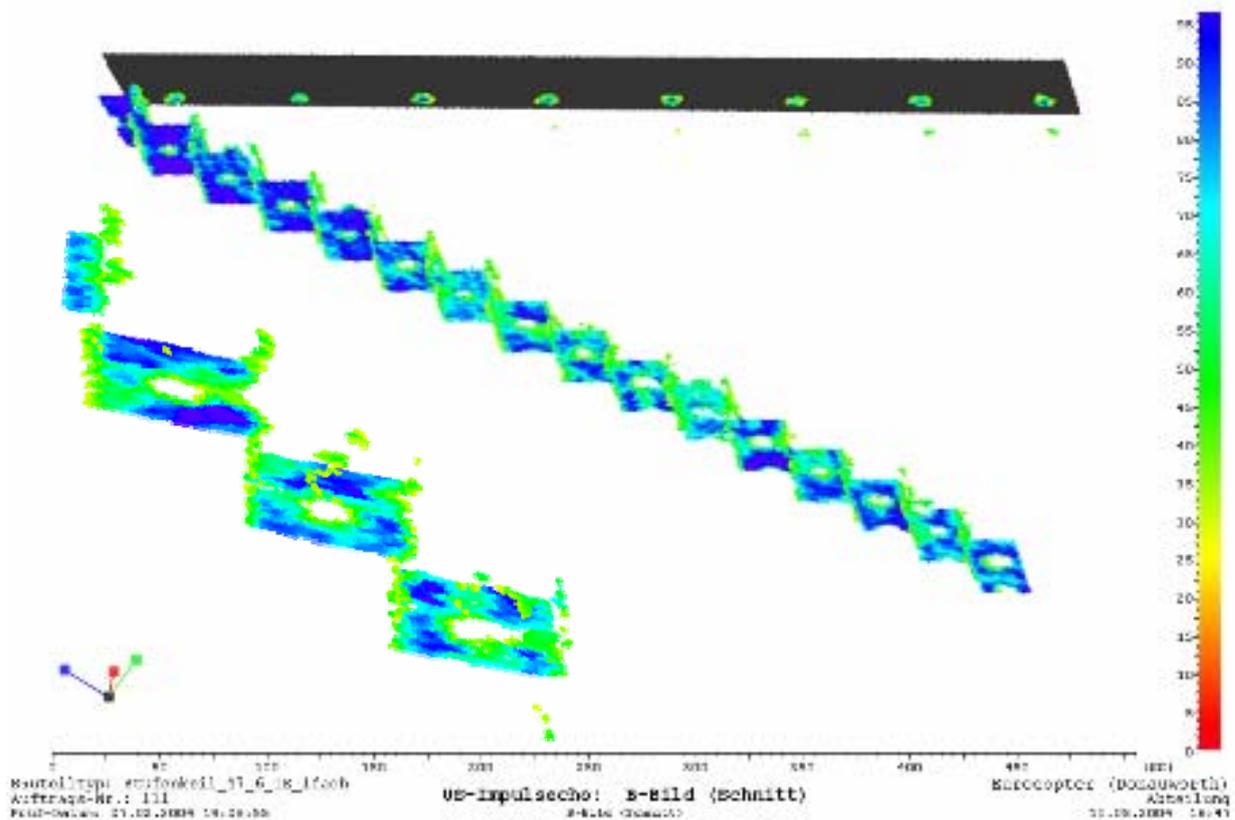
Step wedge: Defects close to the inspection surface and the back wall, with structural noise suppressed. Left bottom a close up of the back wall with a near defect and shadowing
